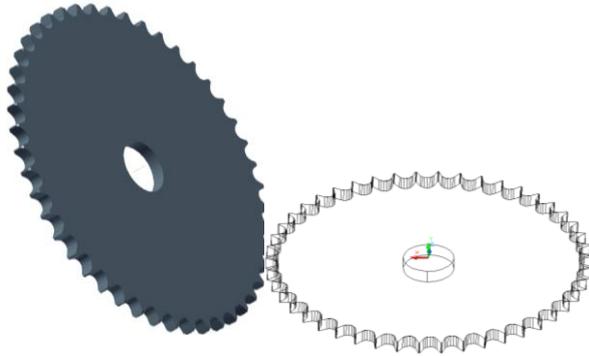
Modeling the chain wheel with Inventor® and AutoCAD® - CAD design tools 2D and 3D of Autodesk® Company USA [1],[2],[3],[9],[10]
